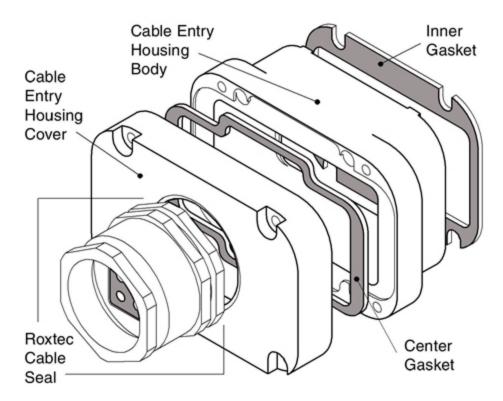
Exploded View of Cable Entry Housing/Seal Assembly (Gaskets are shaded)
